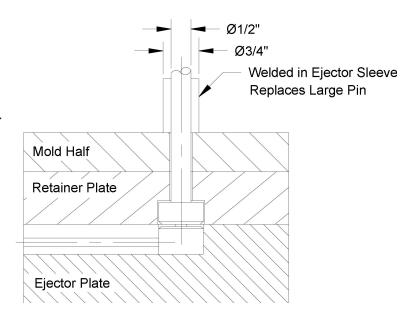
Welded-in Ejector Sleeve Replacement
